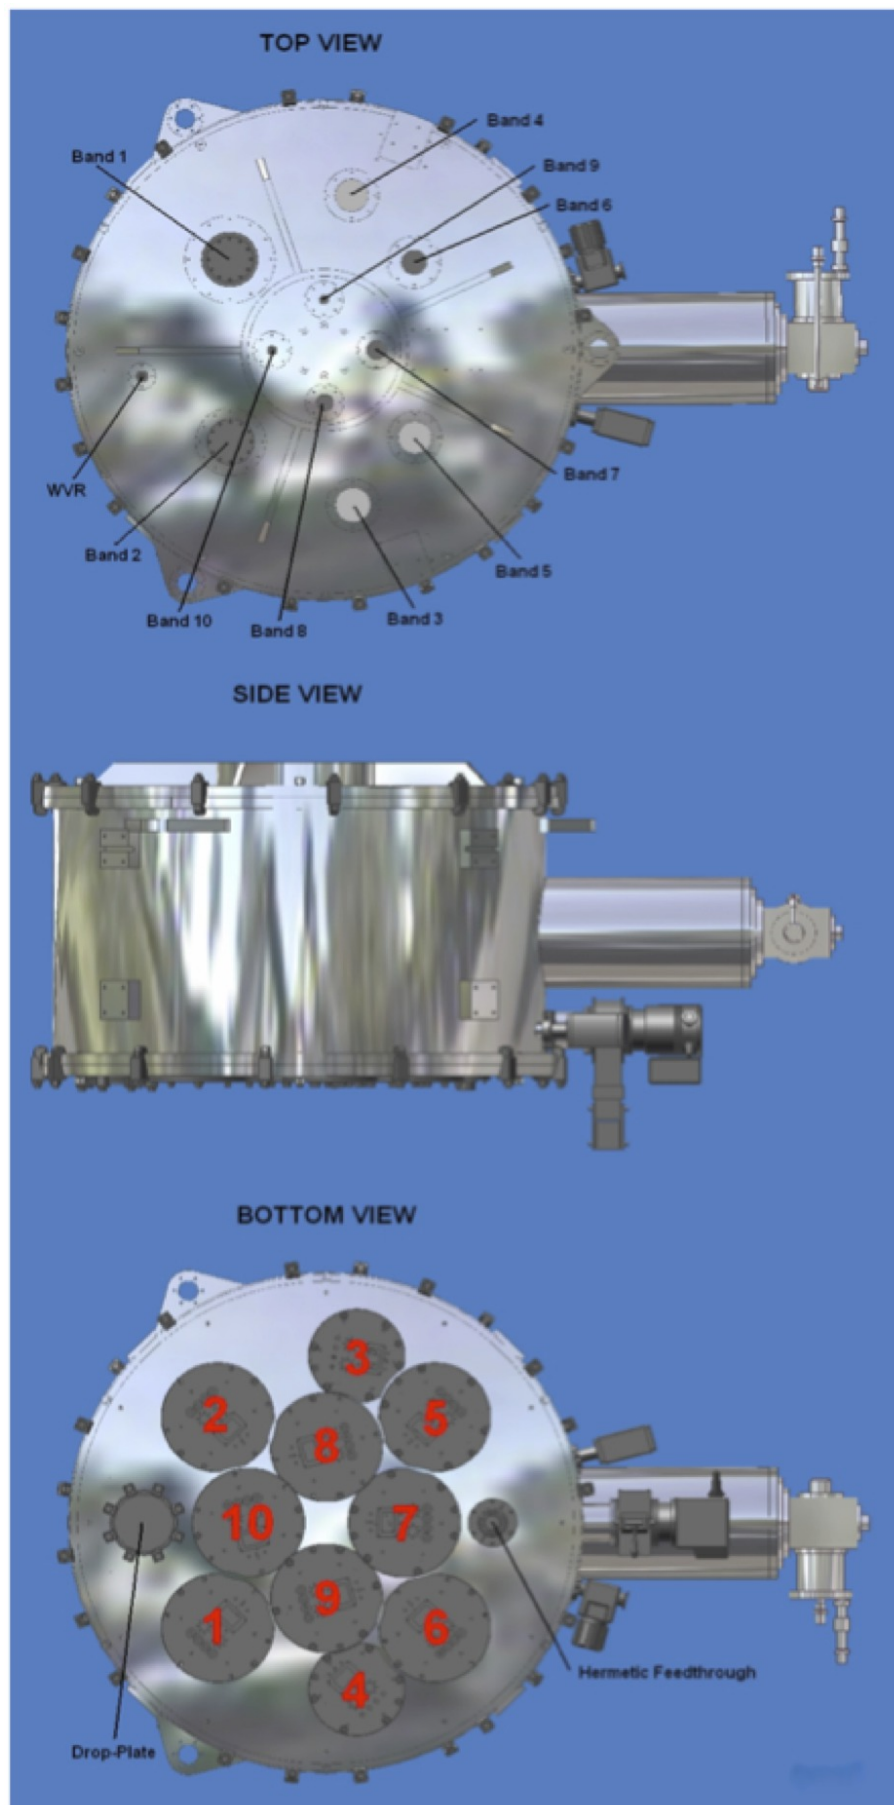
Views of cryostat assembly, showing different windows (top) and the portholes for the WCAs for each band (lower view).
